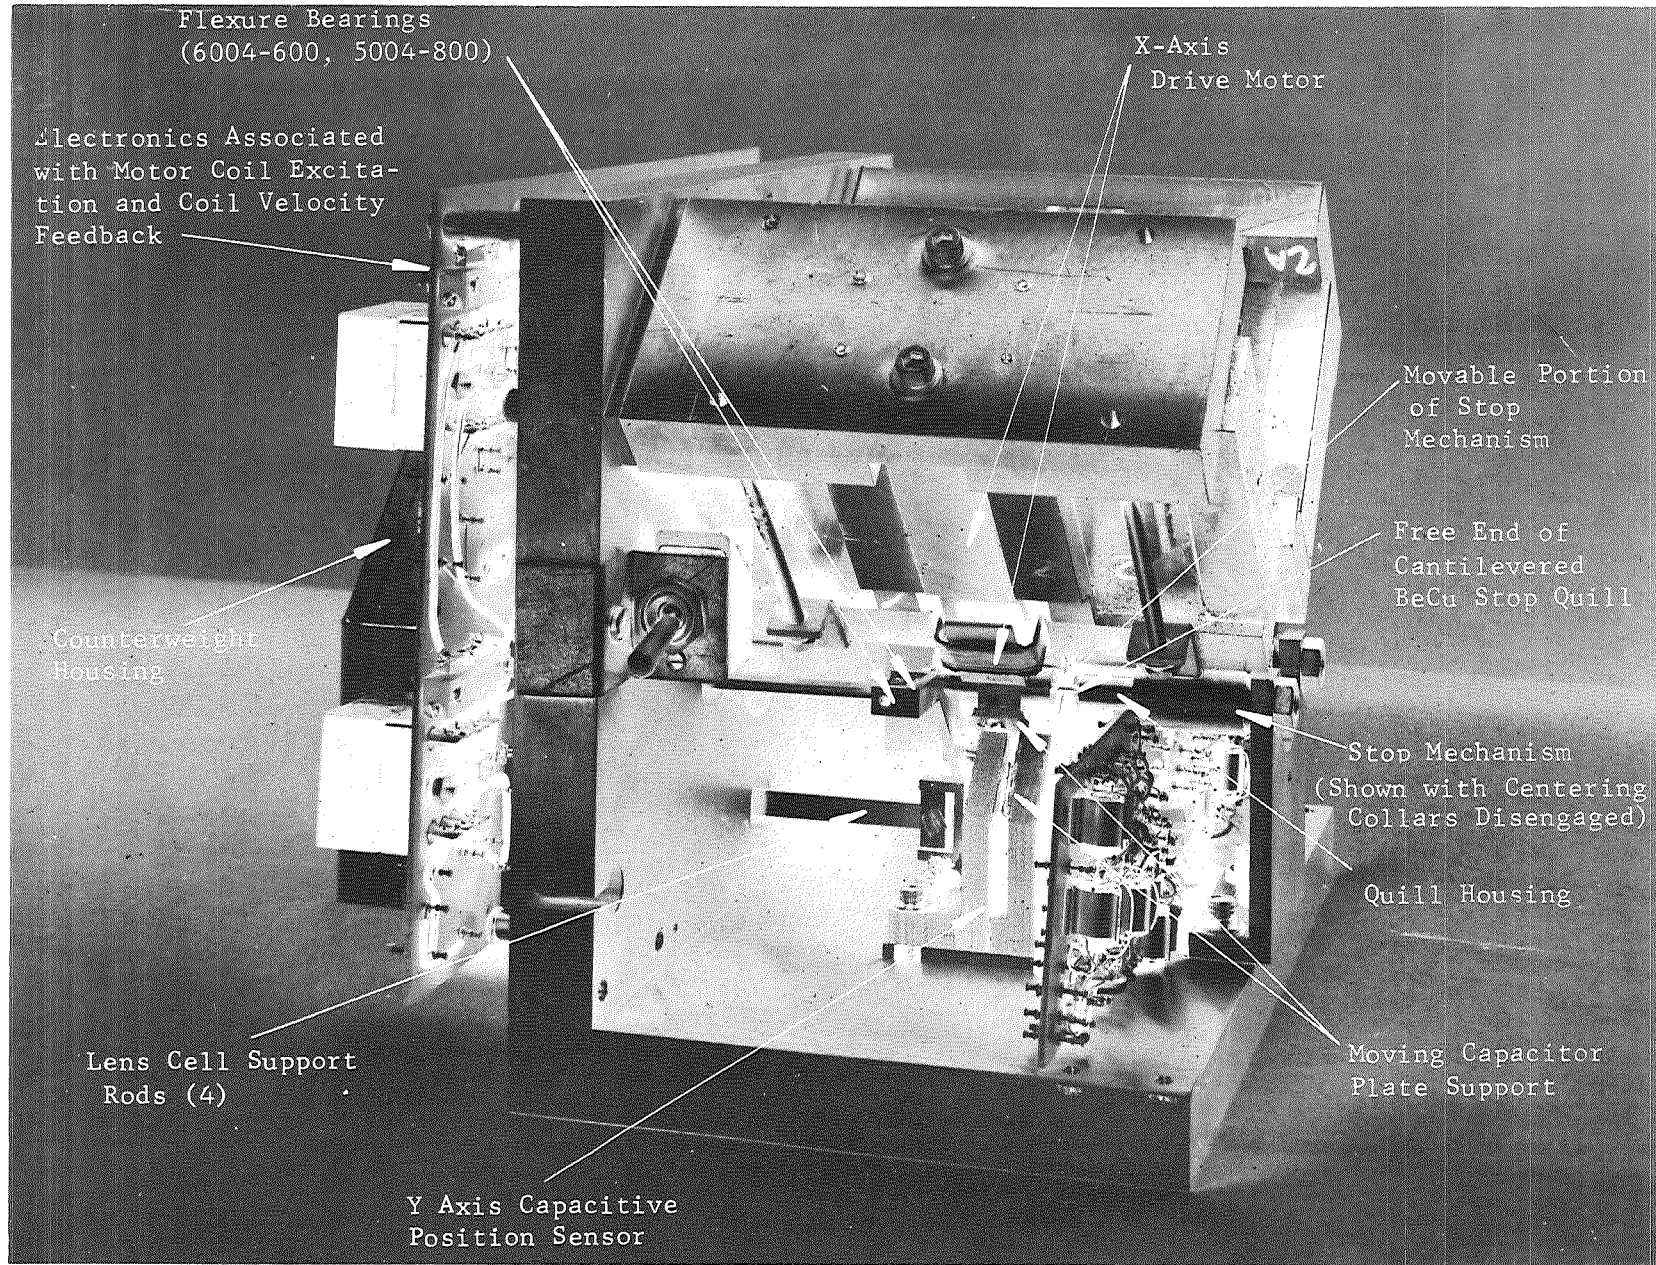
• Transfer Lens Mechanical Subassembly, Side View
